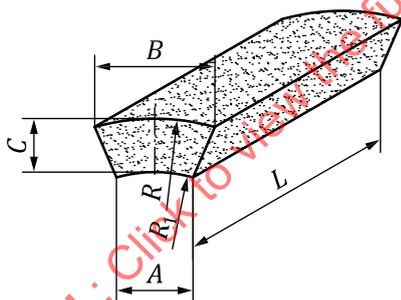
Grinding segment, with outer and inner radius (Type 31D)
